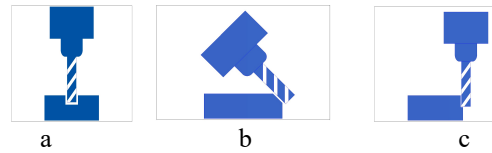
Types of operations: a – slot milling; b – chamfering; c – lateral surface finishing.
